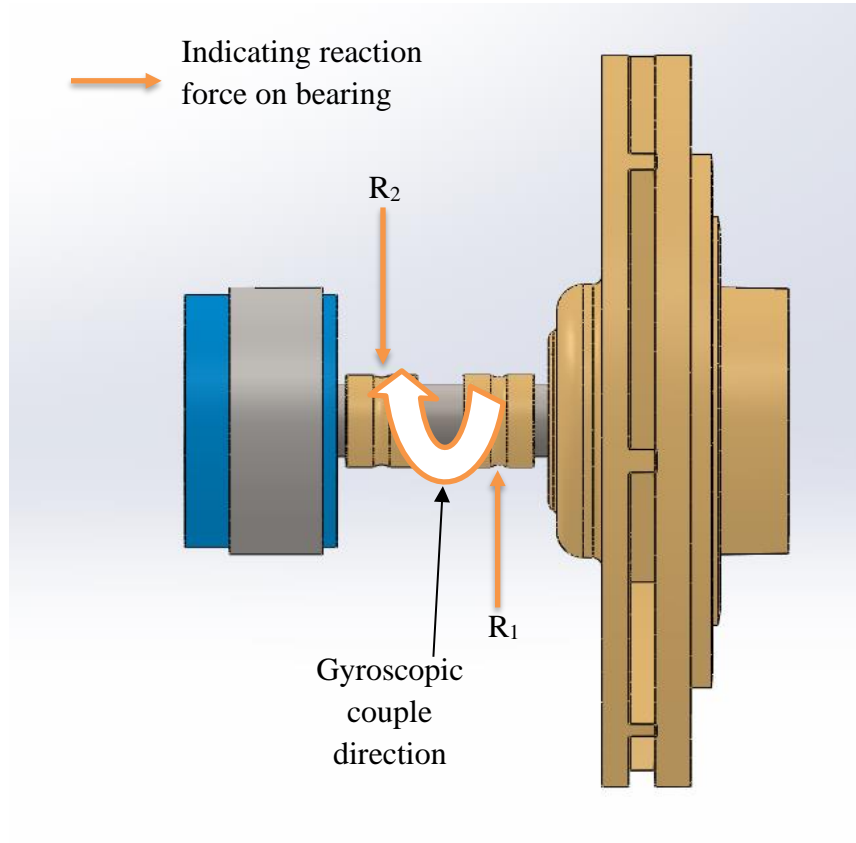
Torque Due to Gyroscopic Couple on Pump Bearing Assembly
